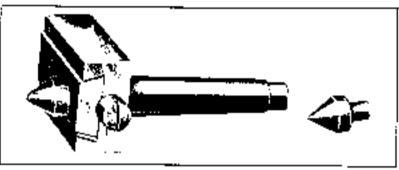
Adjustable Off-Center—center point is carried on slide with screw adjustment allowing maximum offset of 1/4". Furnished with removable male and female centers 1/4" diameter
